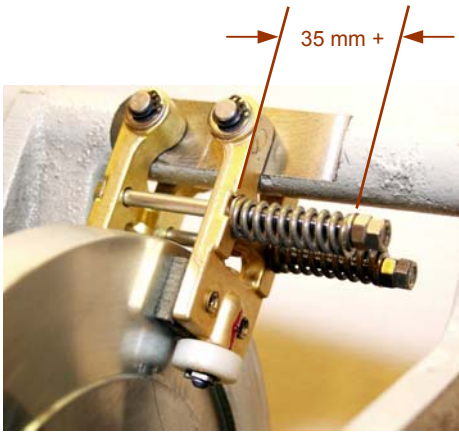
LTC Brake and Nylon Roller Assembly with minimum 35 mm Setting for Spring Tension (Note: Over-tightening may cause accelerated wear of the nylon brake rollers)
